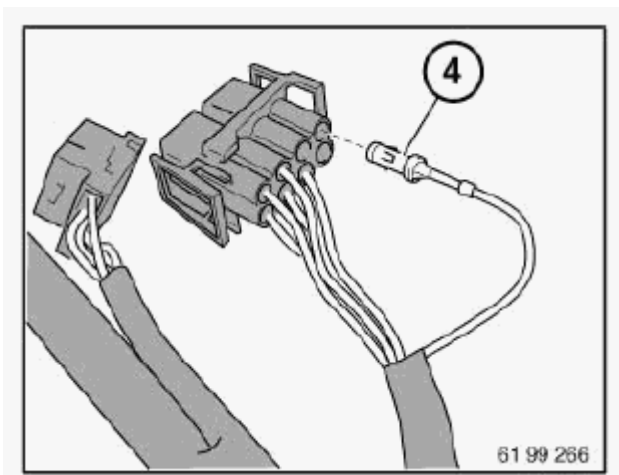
Identifying Damaged Contact Mark With Socket Number
